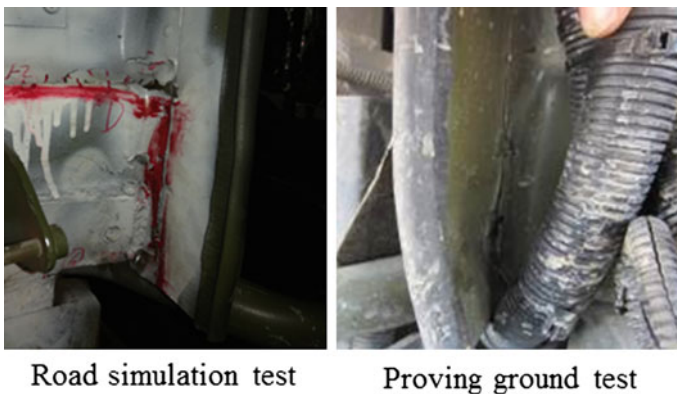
The weld crack between front wall and engine cabin
